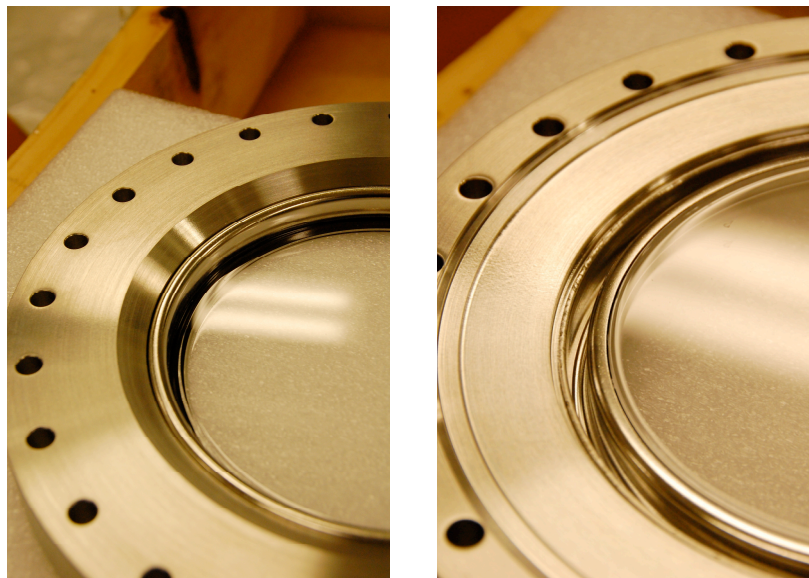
5" aperture Type B Kovar-sealed vacuum viewport in a 10" OD flange, air side (l) and vacuum side (r). NOT OK.
